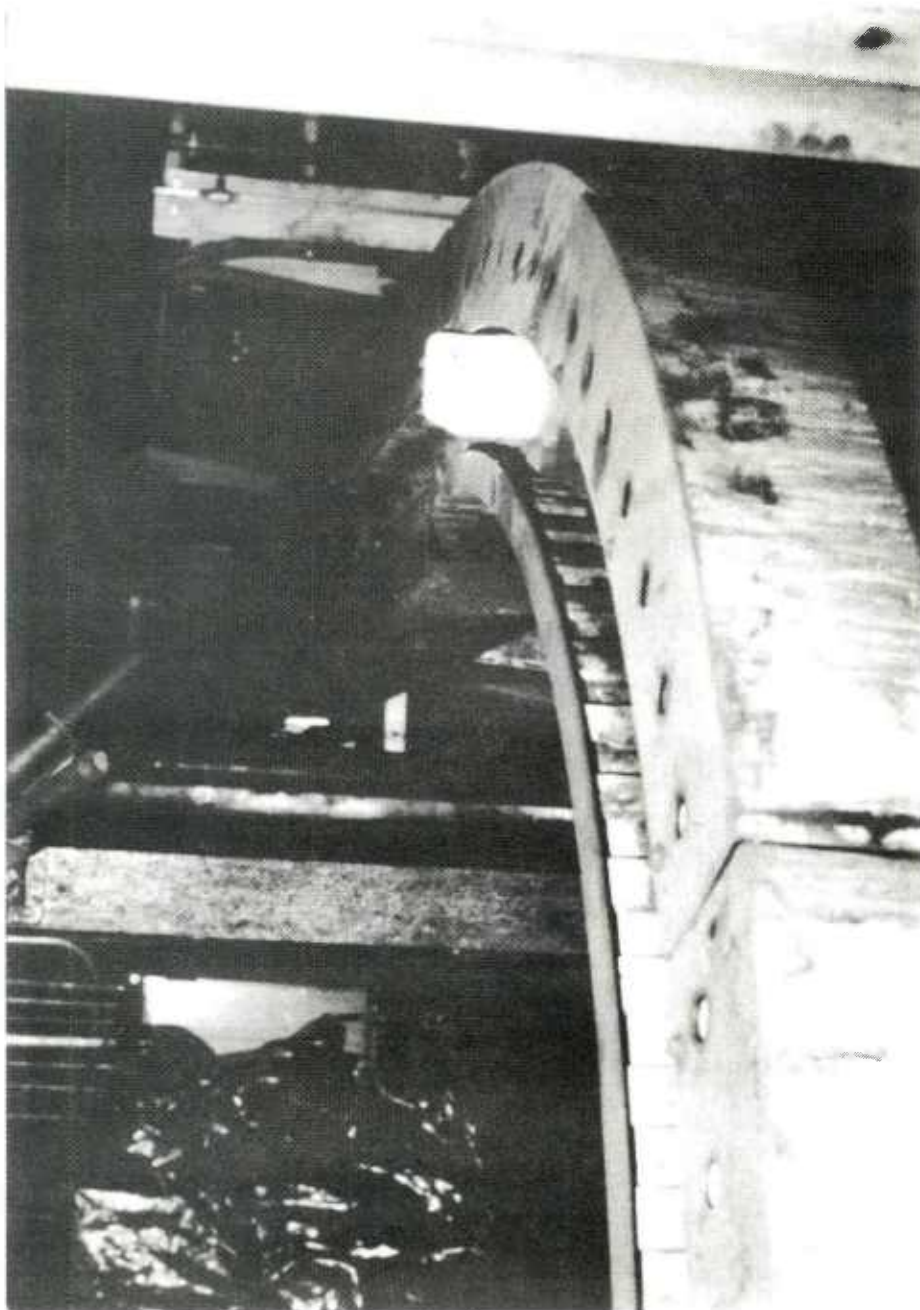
Photo depicting a heated mult on the furnace exit conveyor prior to entering the preform press.
